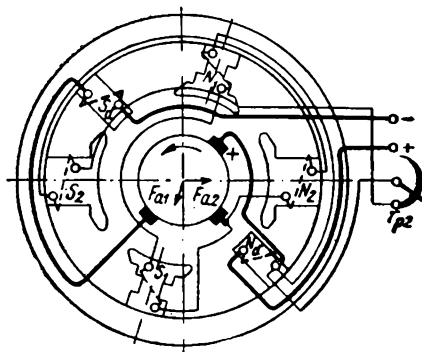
Welding generator put out by Elektrik Works
